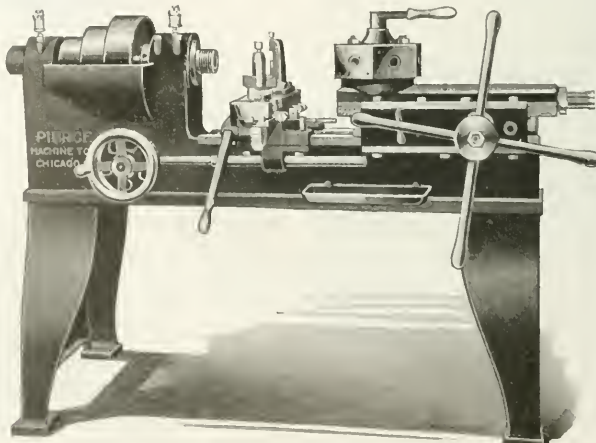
Machine shown in Fig. 1, without Collet, Bar-feed and Stock Support, making 14-inch Turret Lathe
